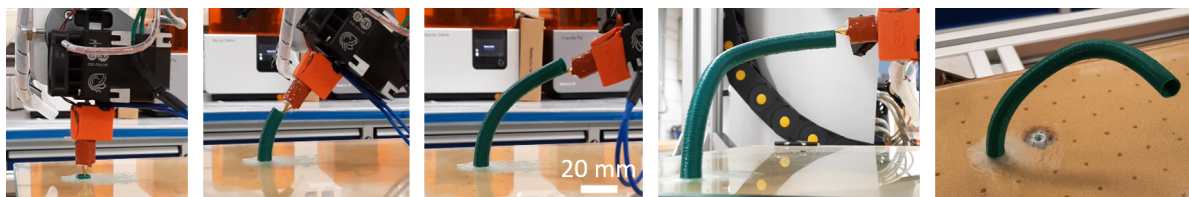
Curved tube printed by the 5-axis printer as a full integration test of the machine.
